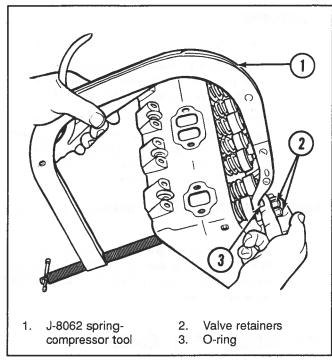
Compressing Valve Spring With Cylinder Head Removed
